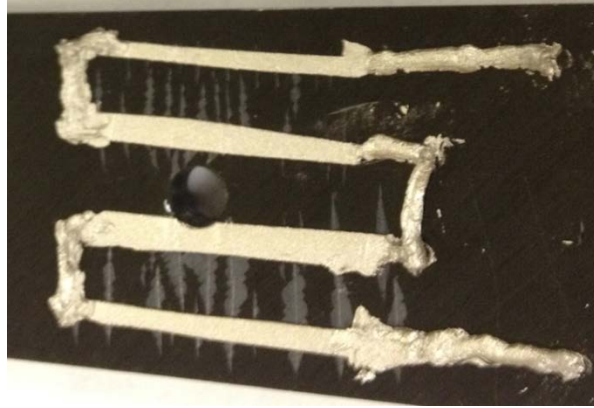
Fatigued open-hole test specimen OHF-5 with cracked epoxy coating and silver epoxy bead
